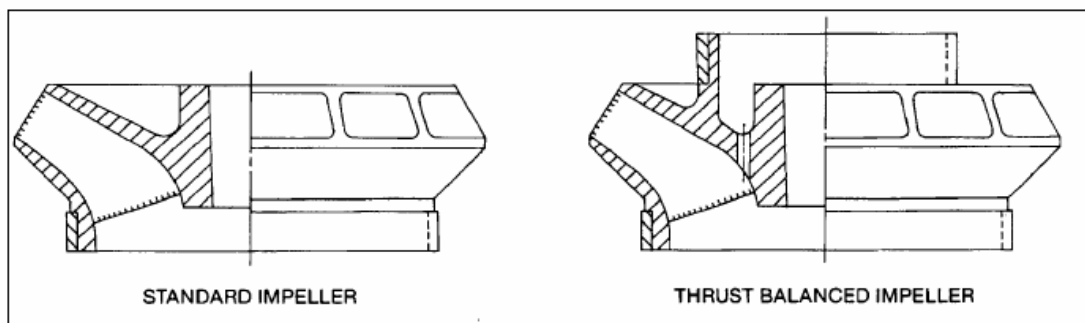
Balancing holes and impeller balancing ring, [20]
